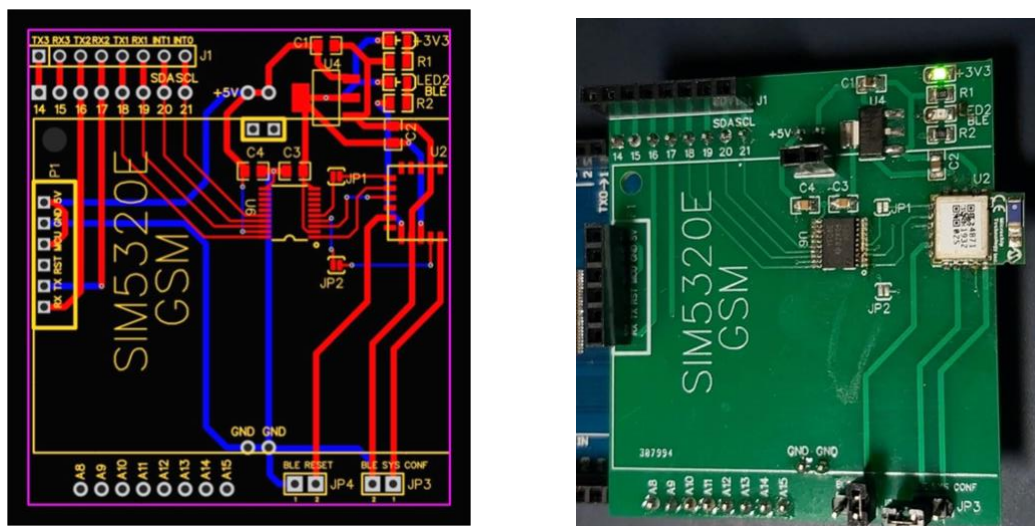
(Left) PCB layout drawing of the shield for the target.
